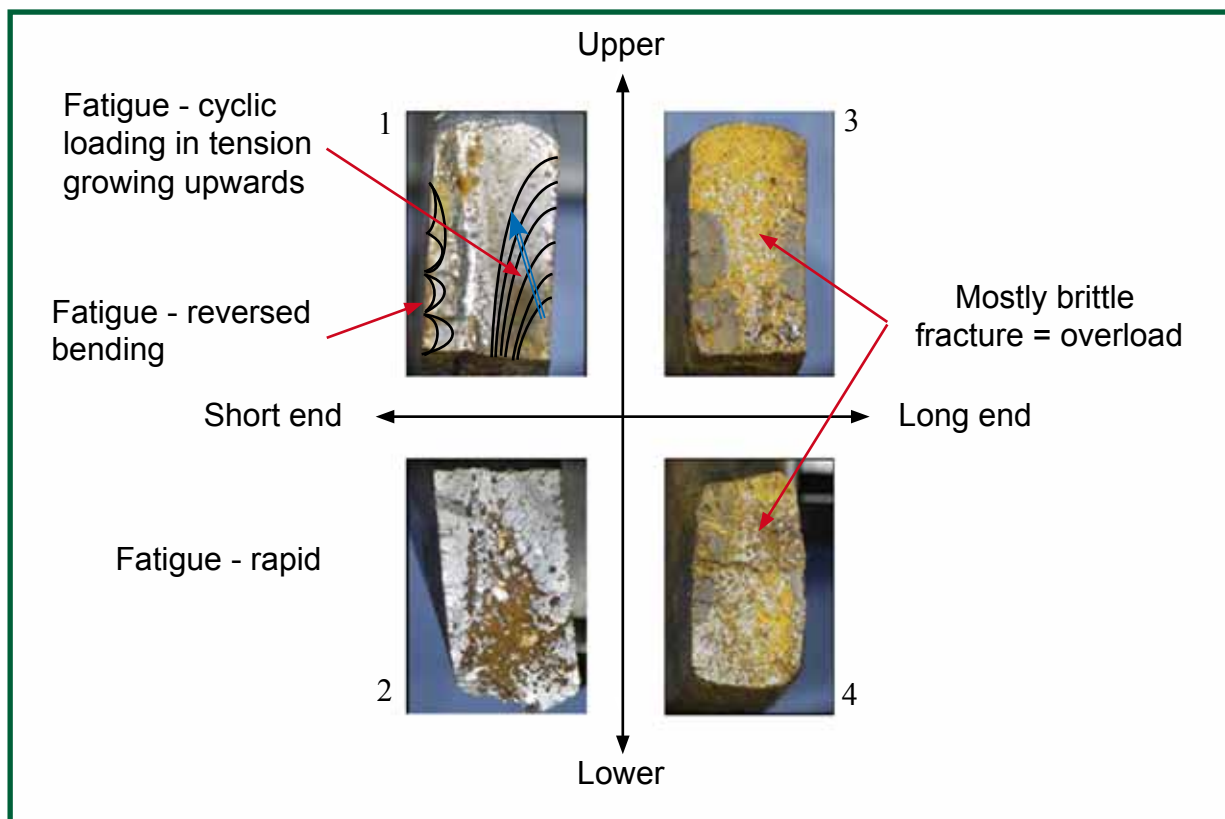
Fatigue surfaces within the swan neck assembly of the third permanent way stretcher bar
